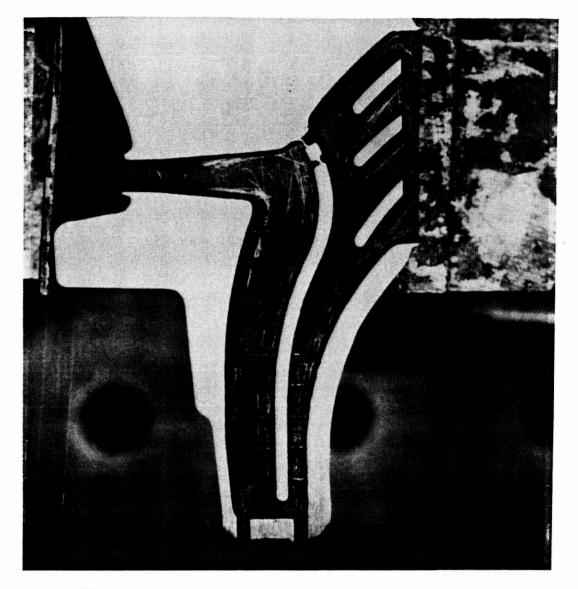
A. Sectioned Blade Produced With Detail Core P/N 131454
